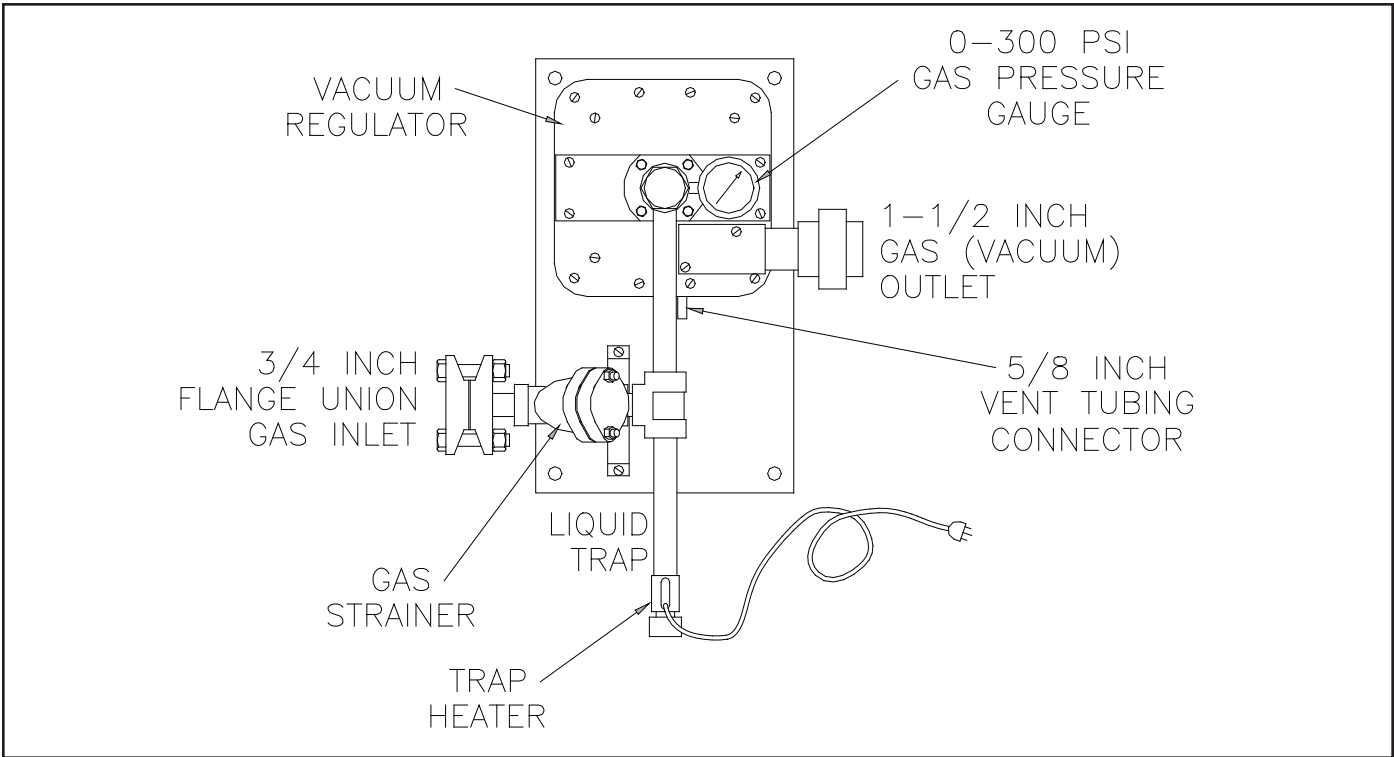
8000 PPD (150 kg/h) Vacuum Regulator Assembly
